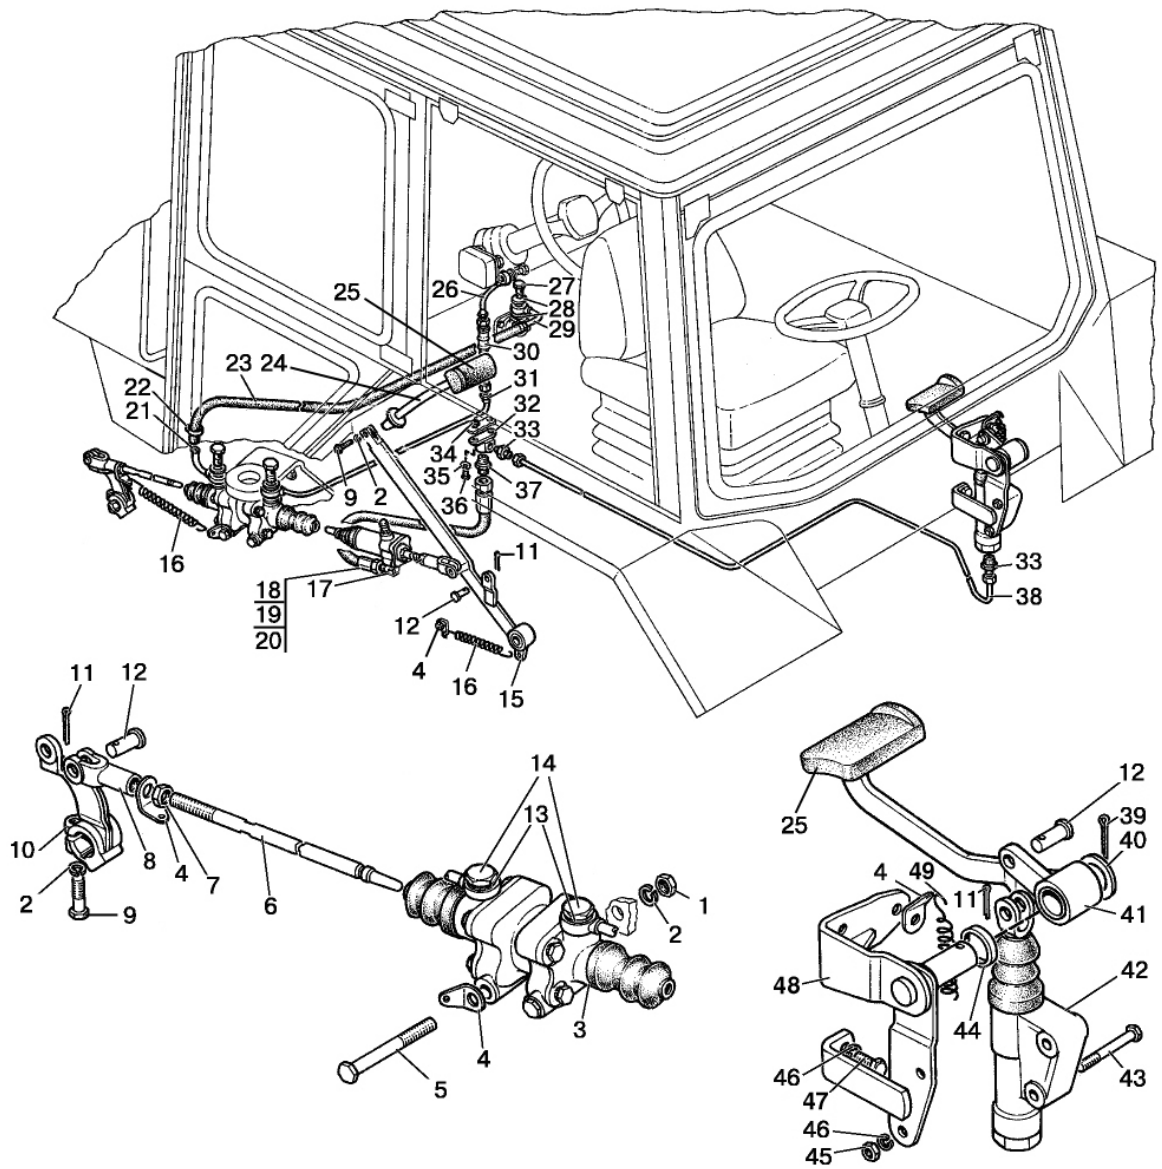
Clutch control ("BELARUS-1221B/1221B.2")
